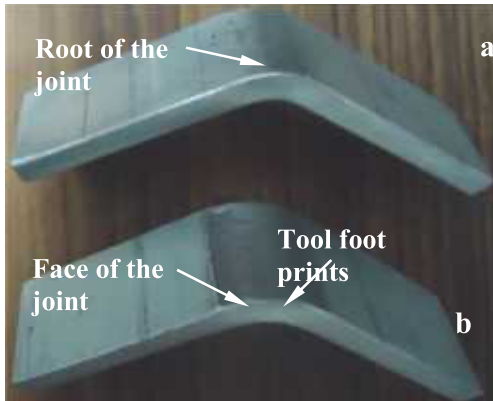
Friction stir weld joints after (a) root bend , (b) face bend test
